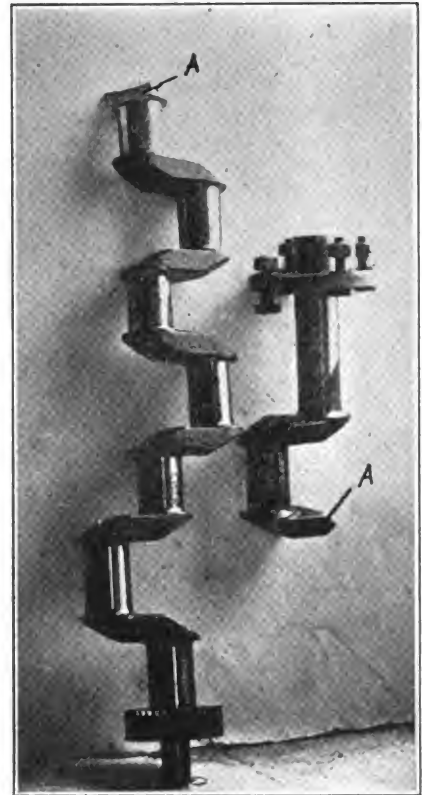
THE CRANK SHAFT AFTER WELDING
